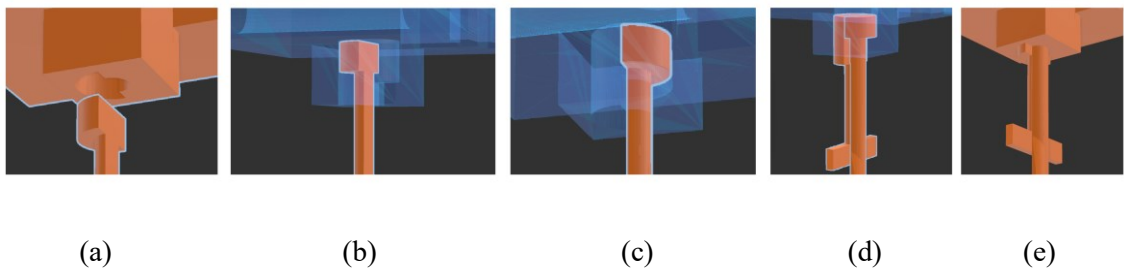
Stroke holder mechanism: (a) Middle part with the stroke holder mechanism and the stroke holder stick. (b) Stroke holder stick inserted into the mechanism. (c) Stroke holder stick rotated by 180 degrees. (d) Inserted stop part that fix the stroke holder stick. (e) assembled mechanism.
